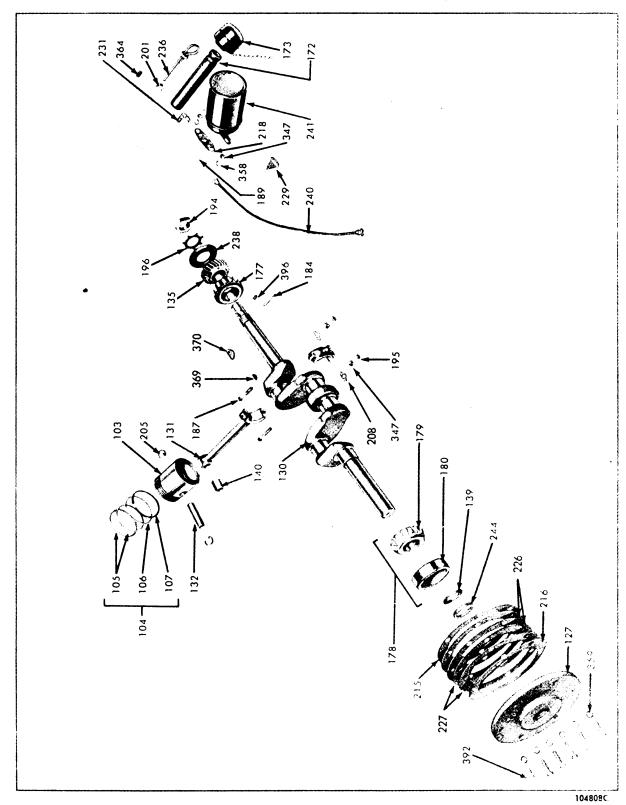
, CRANKSHAFT, PISTON AND CONNECTING ROD GROUP
